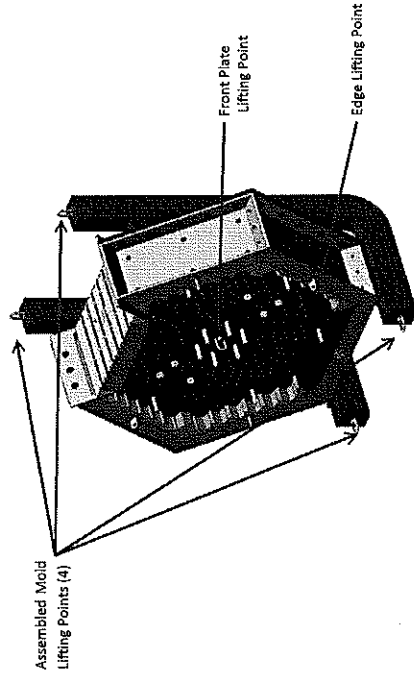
RENDER OF THE ASSEMBLED MOLD DENOTING THE LIFTING POINTS.
